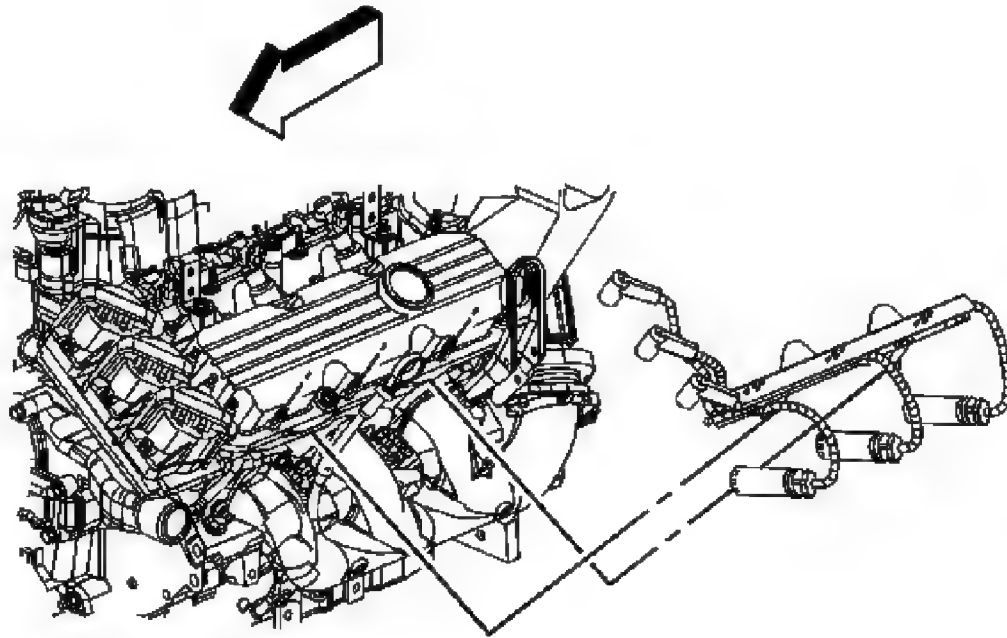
View Of Left Exhaust Manifold (RPO L26)
